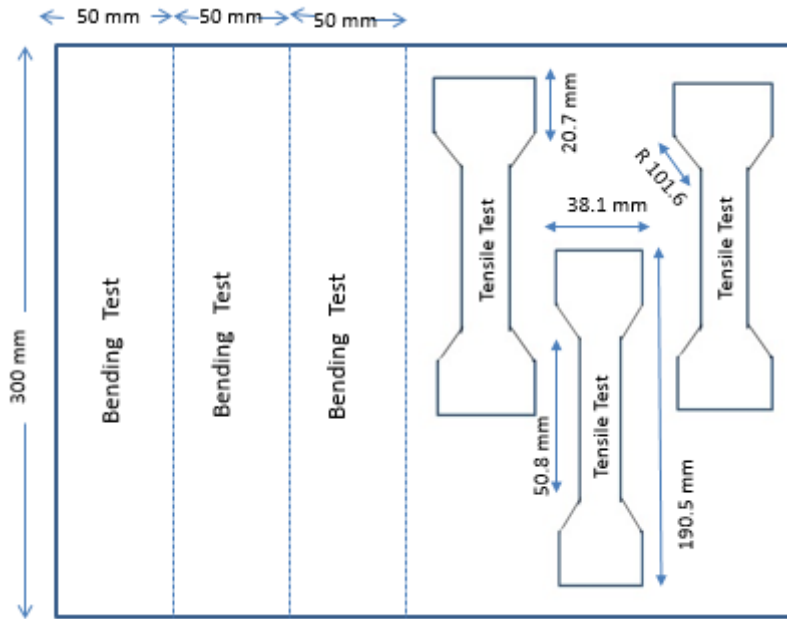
Cutting diagram of particleboard specimens for bending and tensile specimens (mm).
